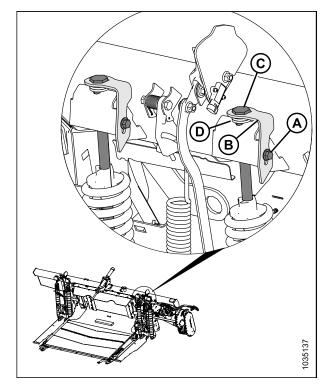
Float Adjustment Bolts – Left Shown, Right is Similar
